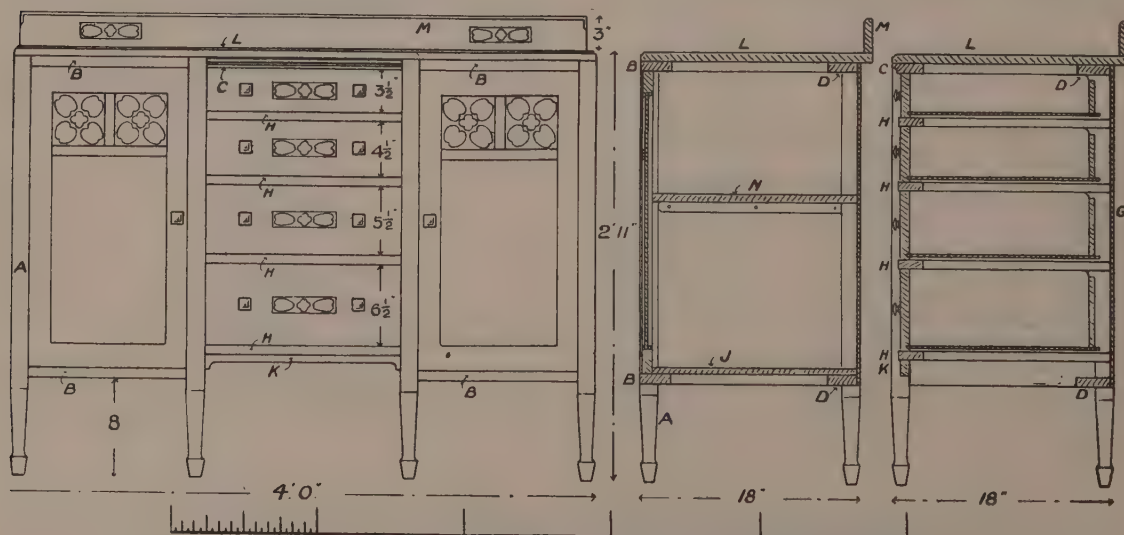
SCALE ELEVATION OF 4 FOOT SIDEBOARD. FIG. 3.—SECTION (CUPBOARD). FIG. 4.—SECTION (DRAWERS).
